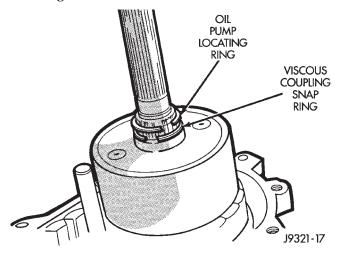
Progressive Coupling And Oil Pump Snap-Ring Installation
